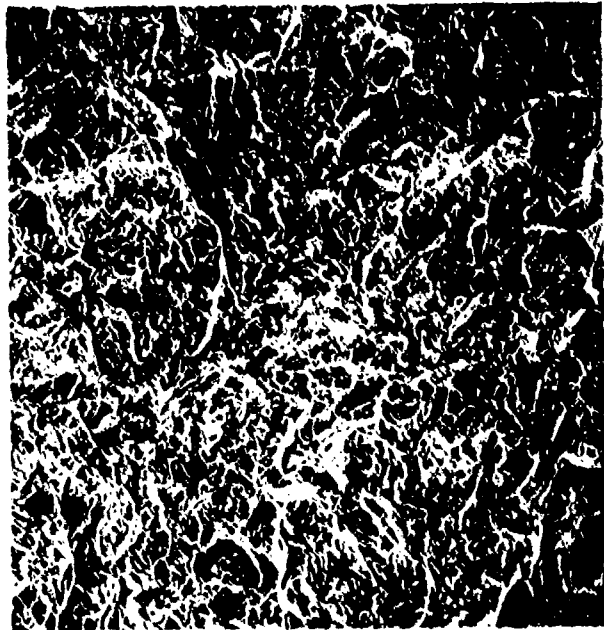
Cleavage fracture in an A-514 Charpy specimen tested at -196°C , 250x.
